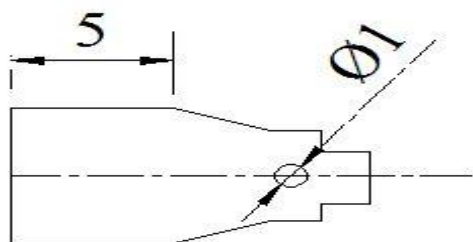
Design view of the screw shaft (all dimensions are in cm).
